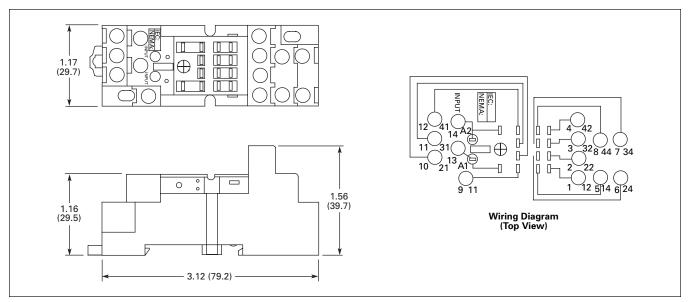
D2PA7 — Approximate Dimensions in Inches (mm)
